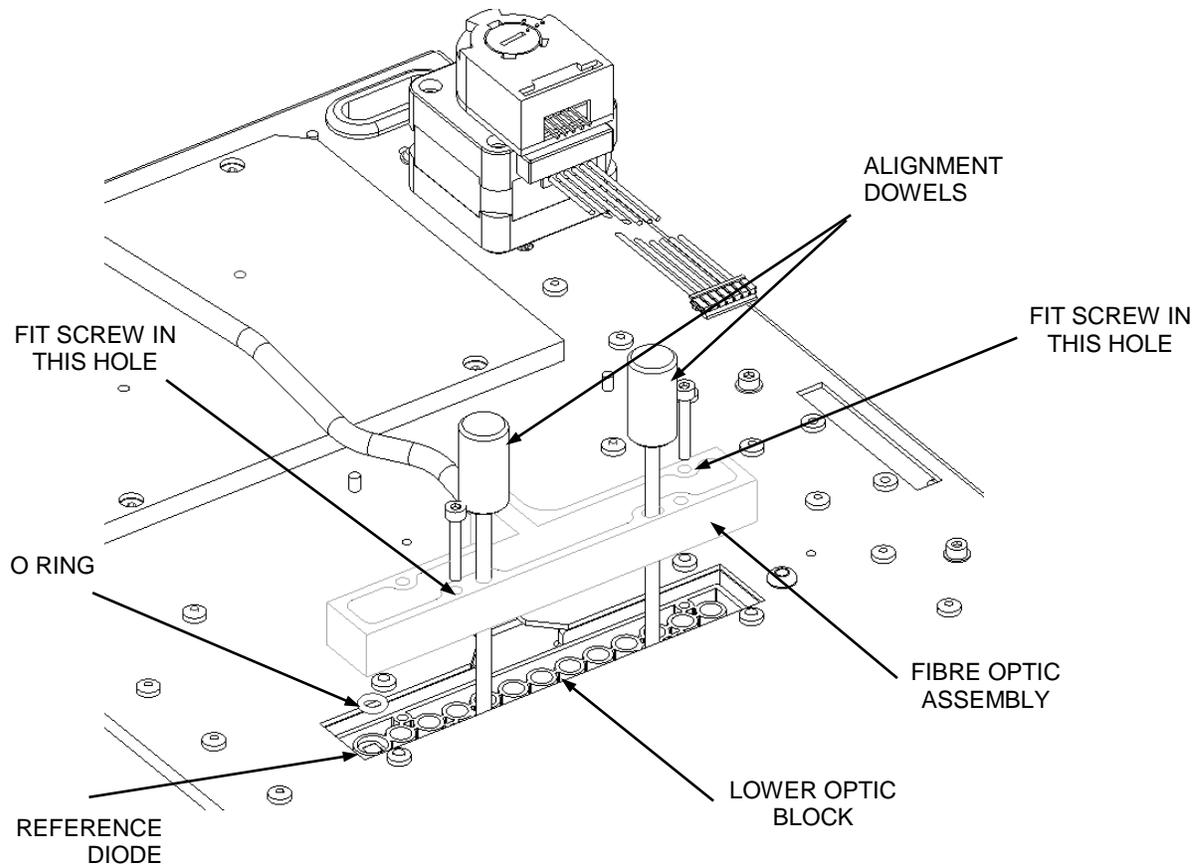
Attaching Fiber Optic Assembly to Lower Optical Block
